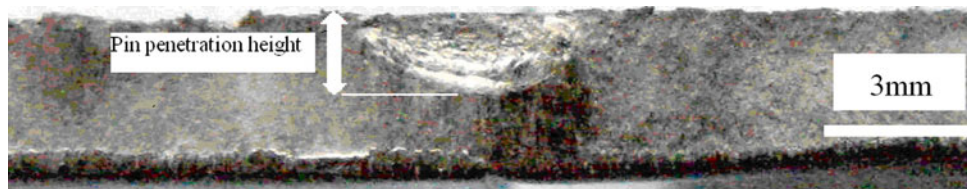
Macroscopic view of cross-sectional area of the weld joint made under condition 1. Tool penetration is not complete because of severe wear of the tool
